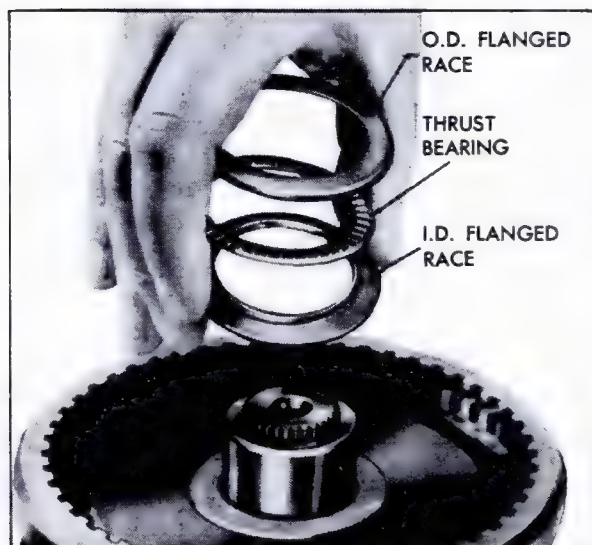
Installing Races and Thrust Bearing on Outer Face of Rear Internal Gear
